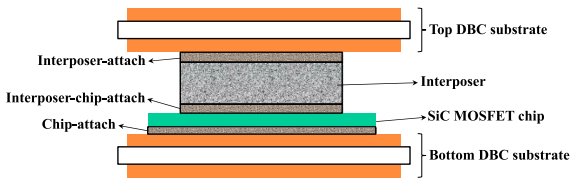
Cross-sectional view of the double-side cooled module showing the layers of different interconnect materials across a device.
